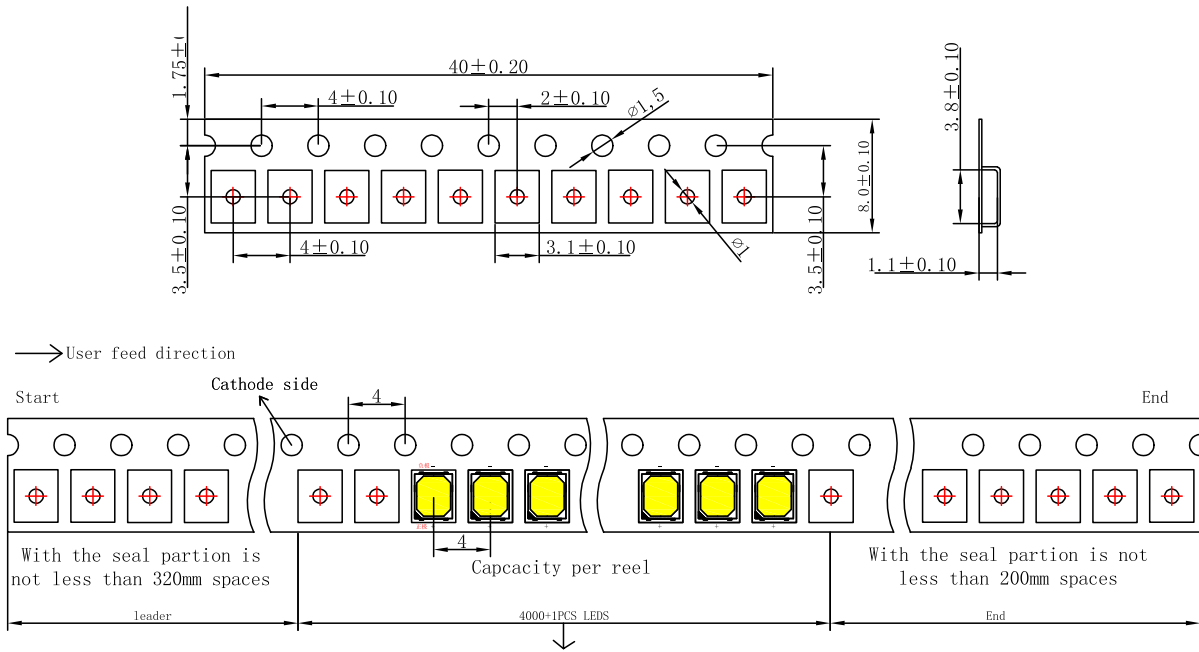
Pocket Tape dimensions for LUXEON 2835 Color Line.
